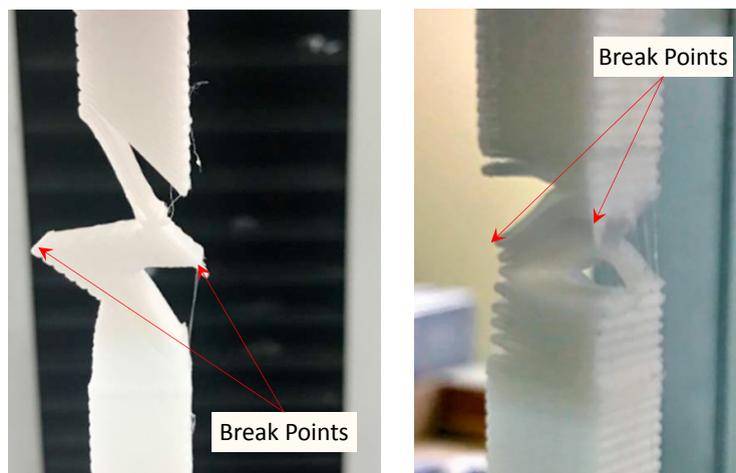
Failure examples of non-overlapped 45° (left) and 90° (right) specimens
